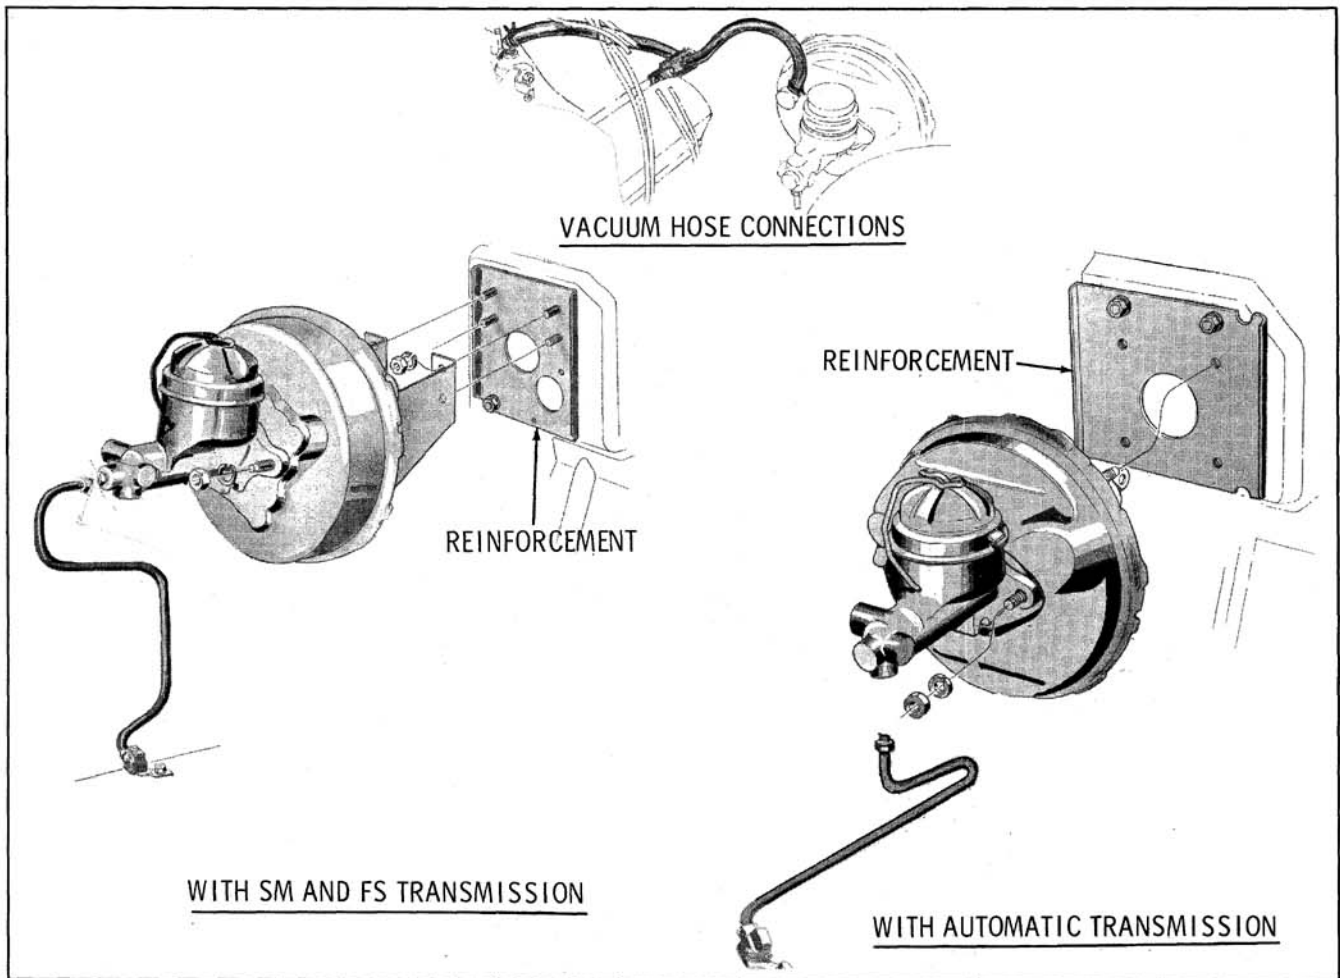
Power Brake Mounting (52 through 86 Series)
